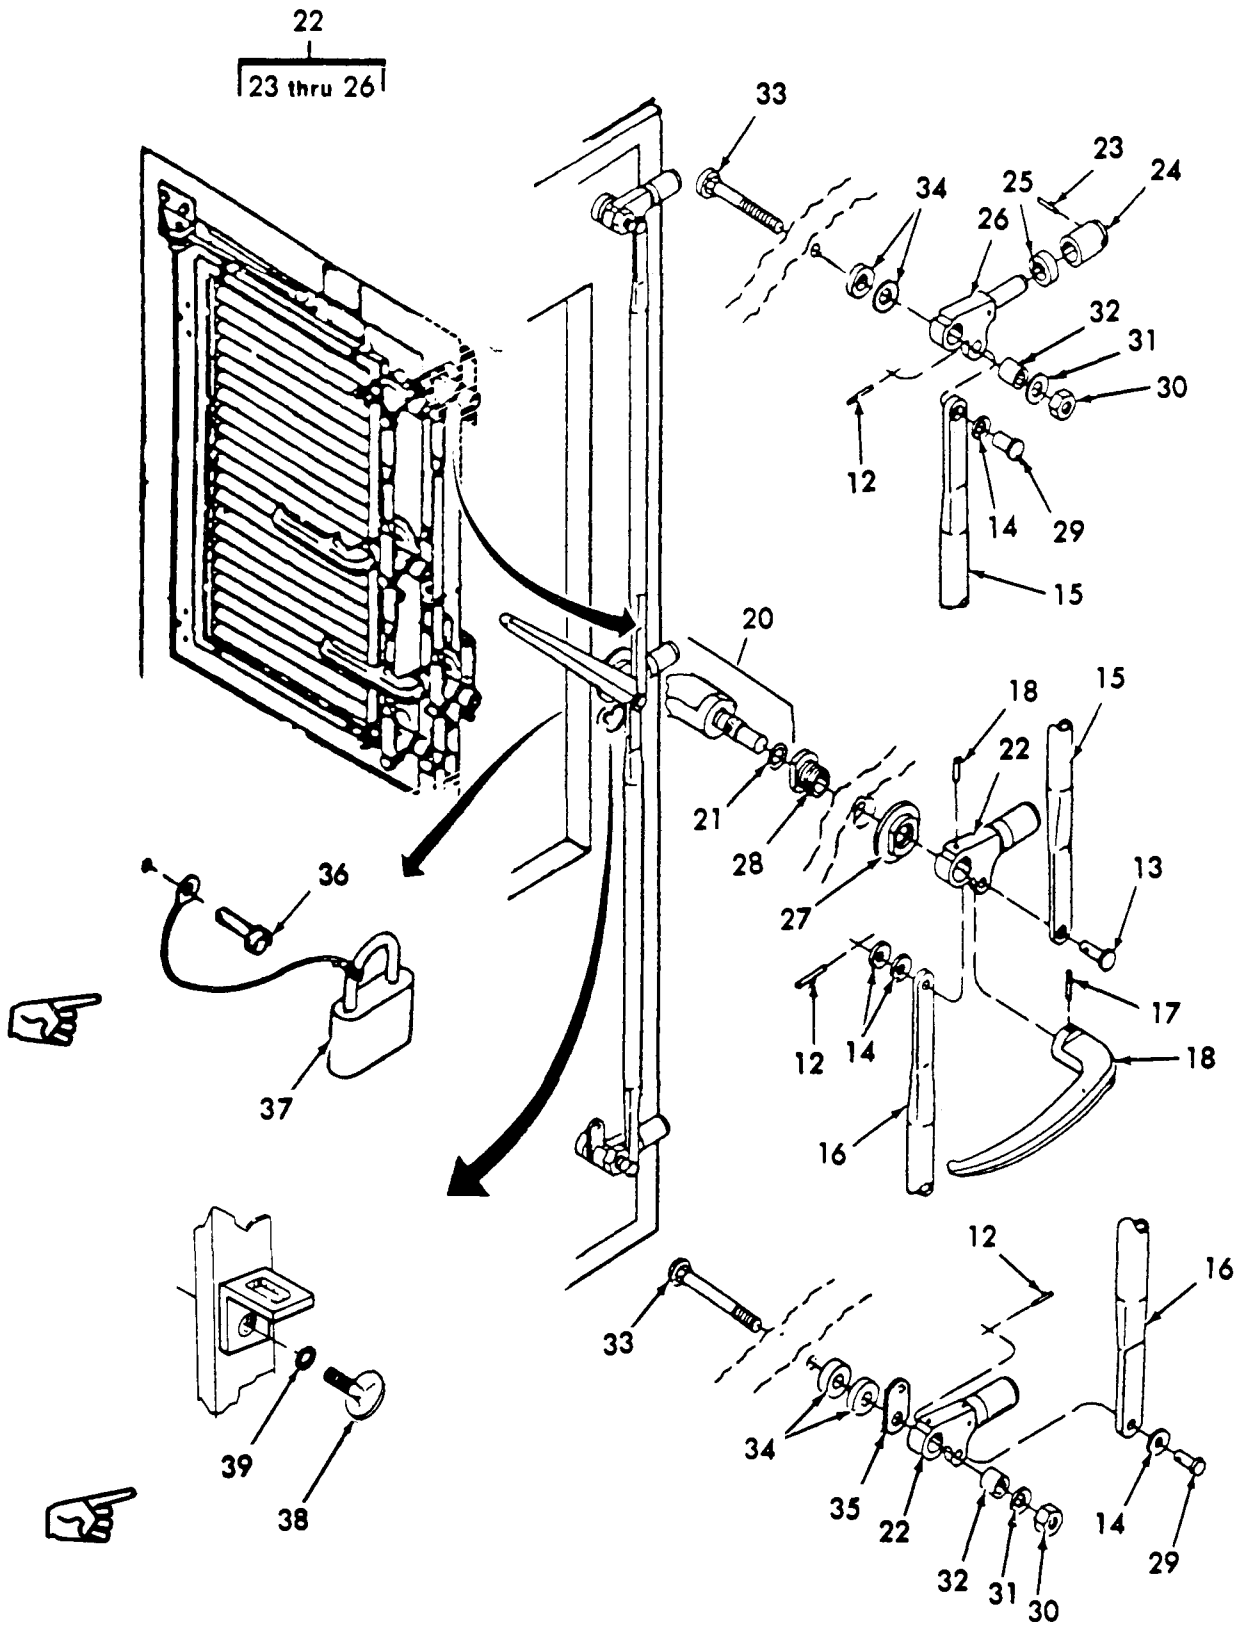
Outer Door Assembly (2 of 2 Sheets)
